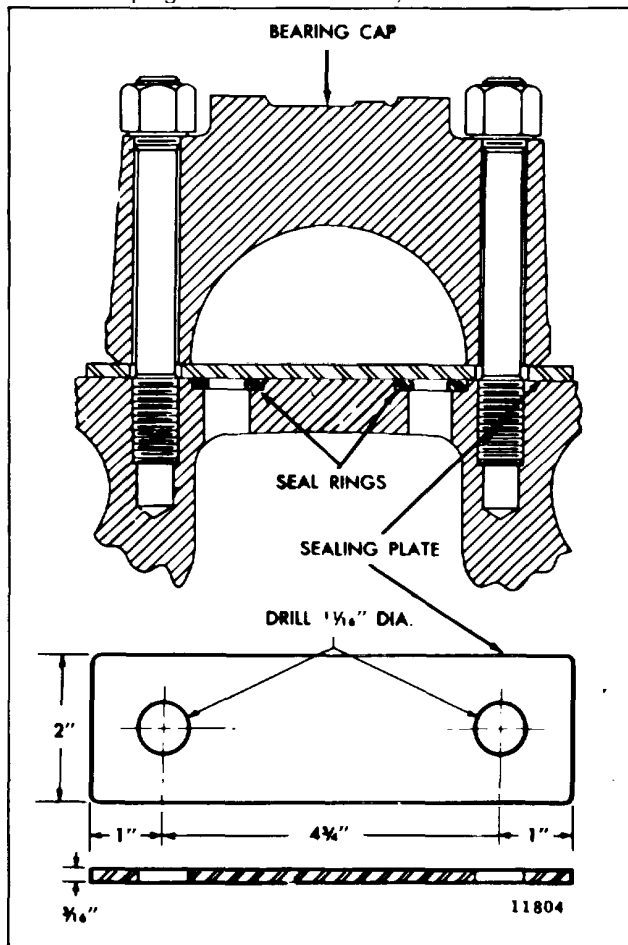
Sealing Plate Details for Pressure Testing Cylinder Block
